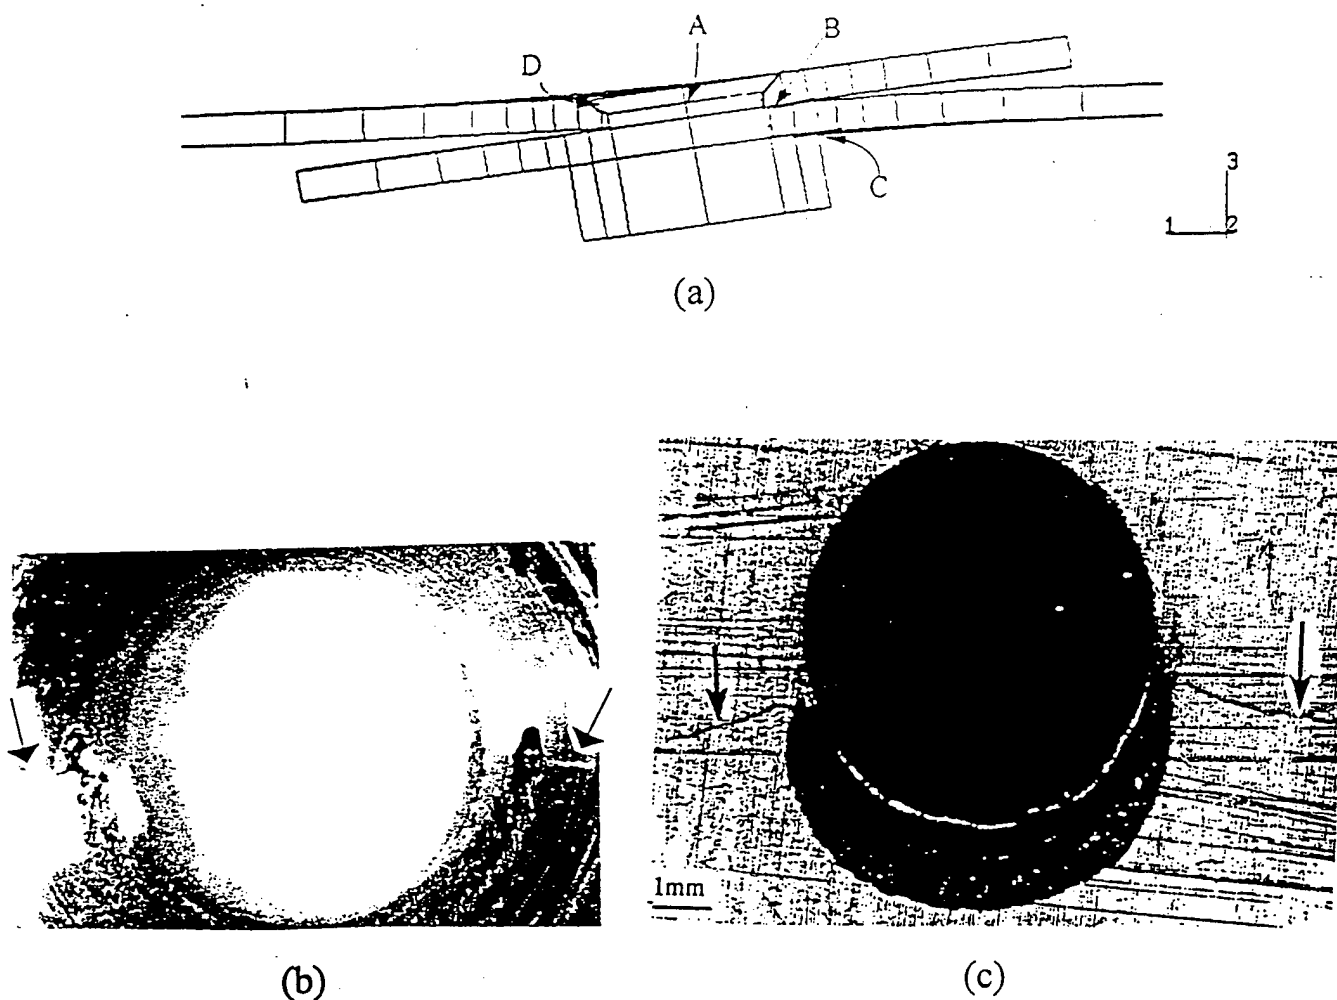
Location of fretting and fretting fatigue at the rivet shank-panel and panel-panel interfaces of a single rivet-row lap joint: (a) 4 locations A, B, C, and D. (b) Example of fretting-fatigue of the panel in location A where fretting is in conjunction with high cyclic tensile stress. (c) Example of fretting – the dark crescent region – and fretting fatigue cracks in the panel in location B at edge of crescent where fretting is in conjunction with high cyclic tensile stresses attending. Fretting does not spawn cracks in location C and D because of the attending compressive stresses.
